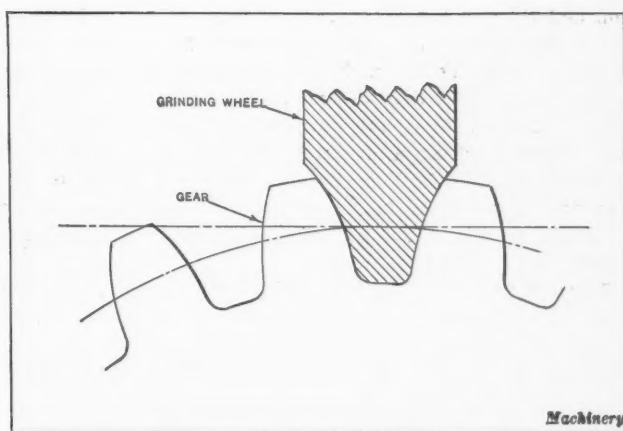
Formed-wheel Method of Gear Tooth Grinding
